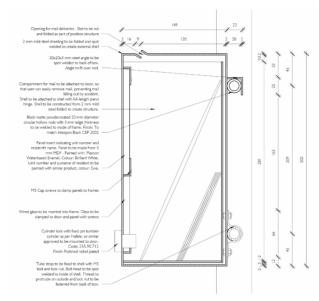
Section B-B of single postbox, not to scale (by Author)
